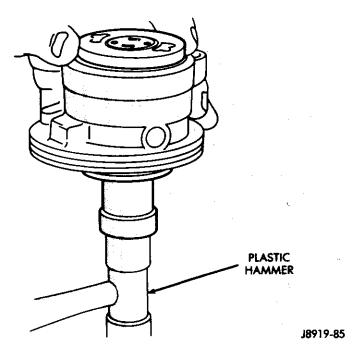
Pressure/Thrust Plates & Ring/Rotor Removal
